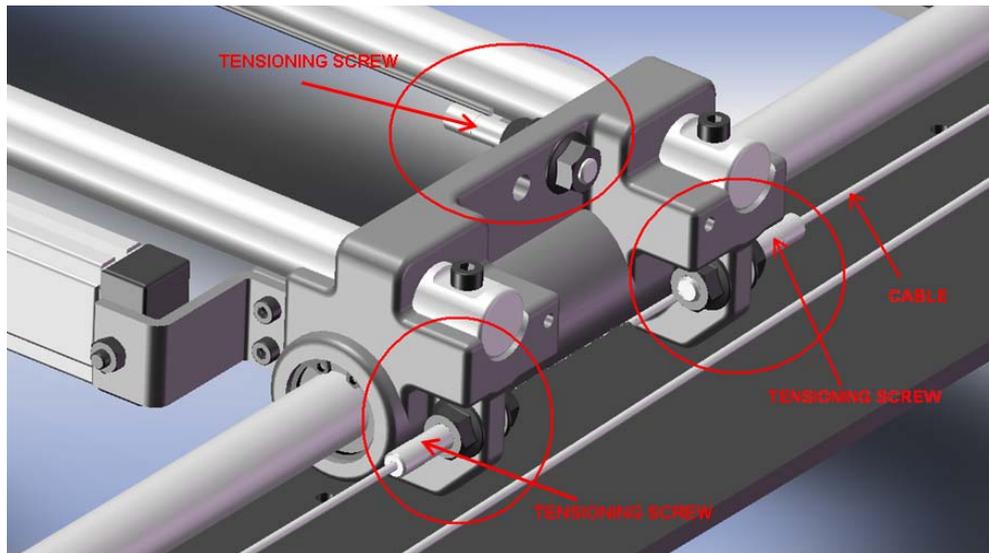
Tensioning Screws for Adjusting the Tension in Cable
